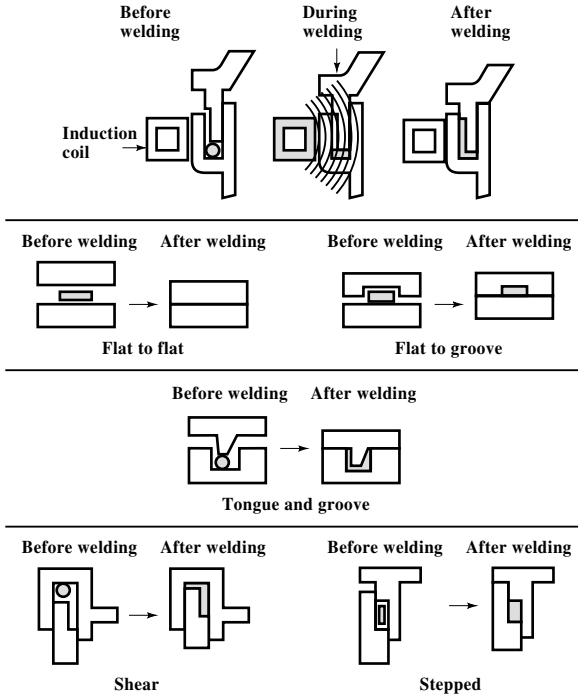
Typical Joint Designs Used in Induction Welding of Plastics Materials
